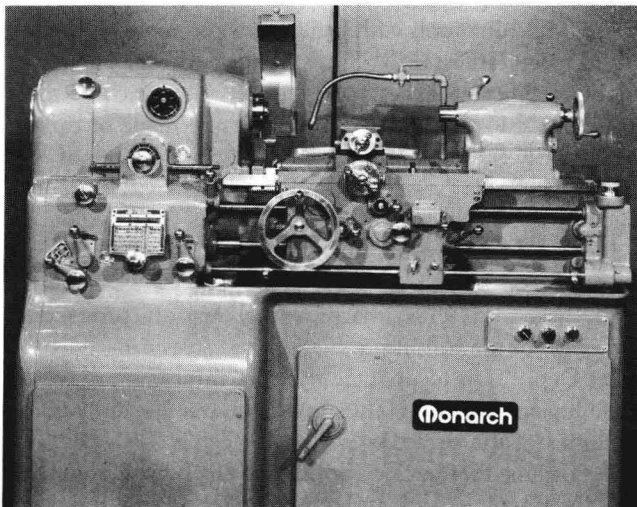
An engine lathe is used to produce round work. (Courtesy Monarch Machine Tool Company.)
